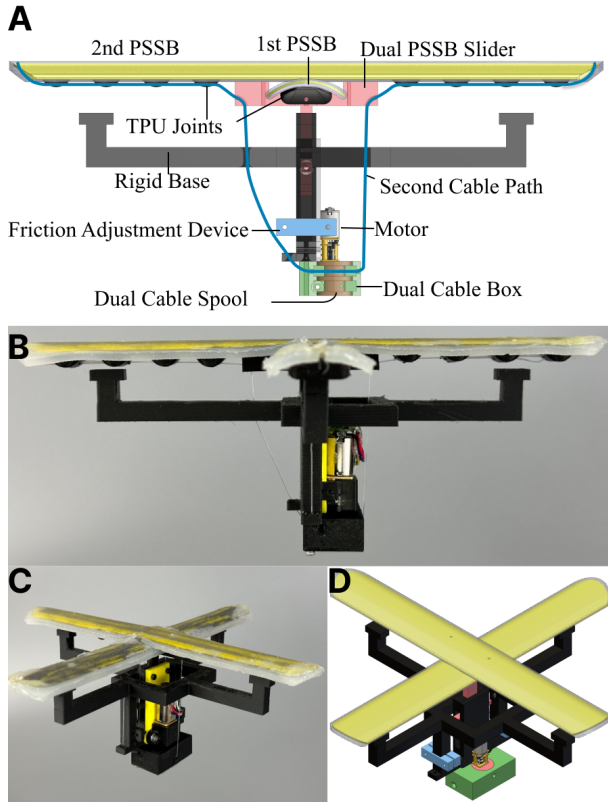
Design for the Cross-Shaped Gripper. (A) A solid model that details the design and components of the cross-shaped gripper including the cable path (blue) for the second PSSB; (B) and (C) Front and Isometric views of the cross-shaped gripper; (D) Isometric rendering of the cross-shaped gripper where component colors match the solid model in A.
